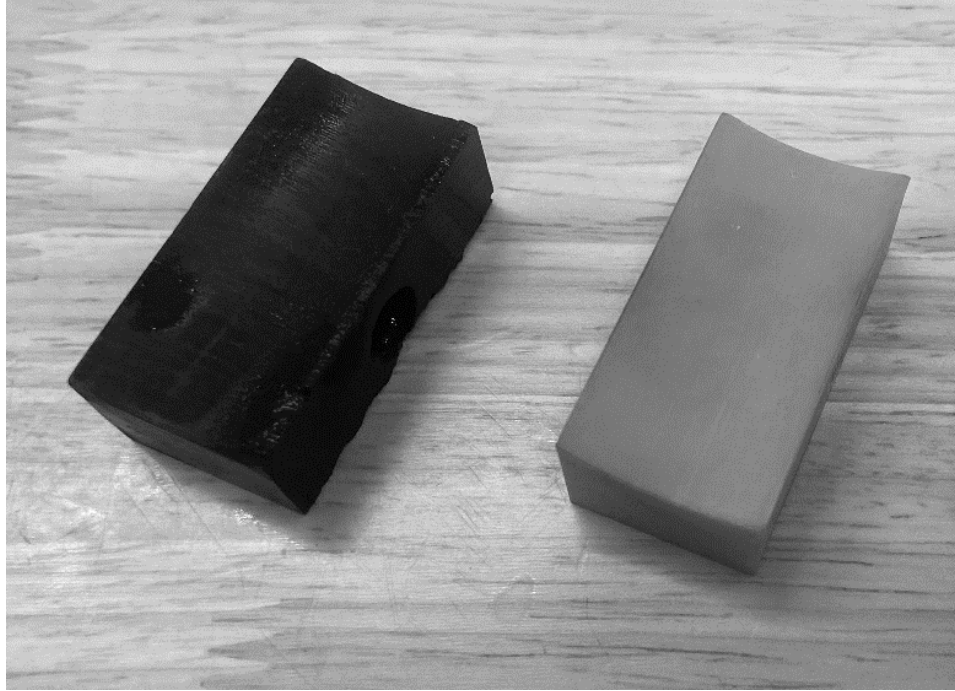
Image of *Guaiacum officinale* and polyurethane elastomer samples machined to size.
